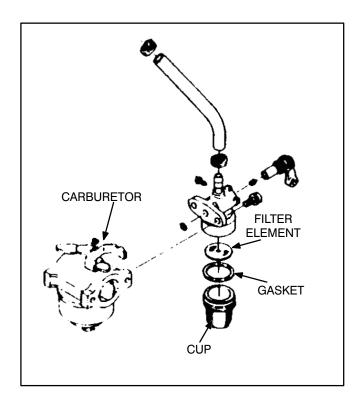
FUEL FILTER REPLACEMENT, GH170 AND GH280 ENGINES
